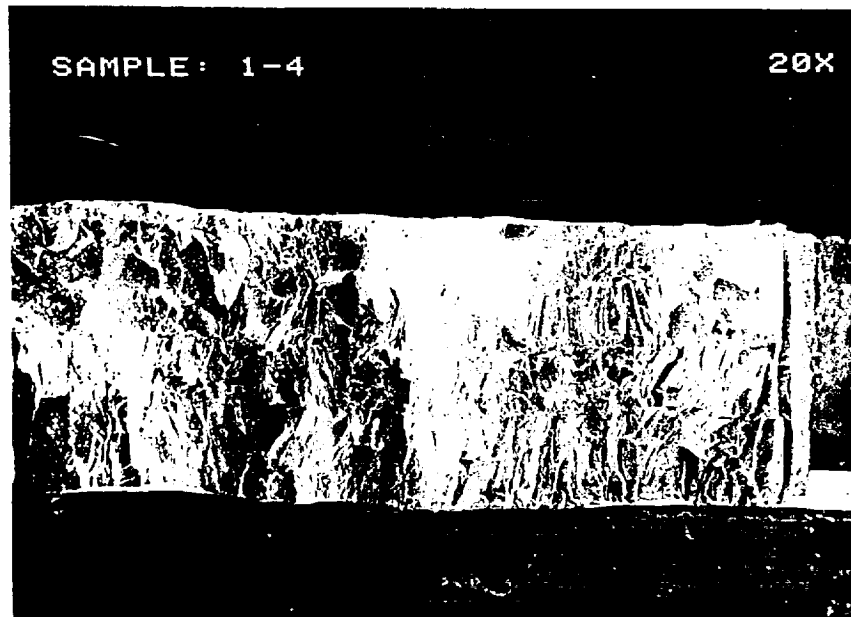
SEM view of fracture in tensile specimen 1-4, 75F, annealed. 20X.
